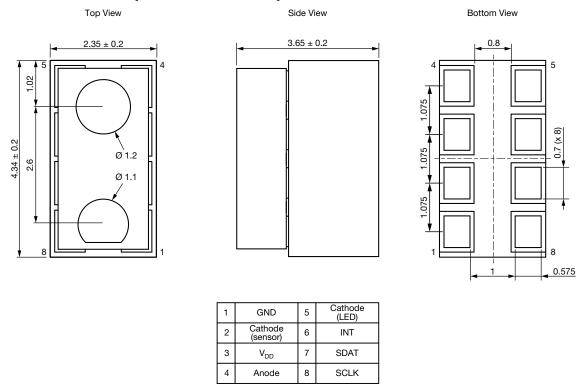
VCNL4040M3OE-H5 Package Dimensions
